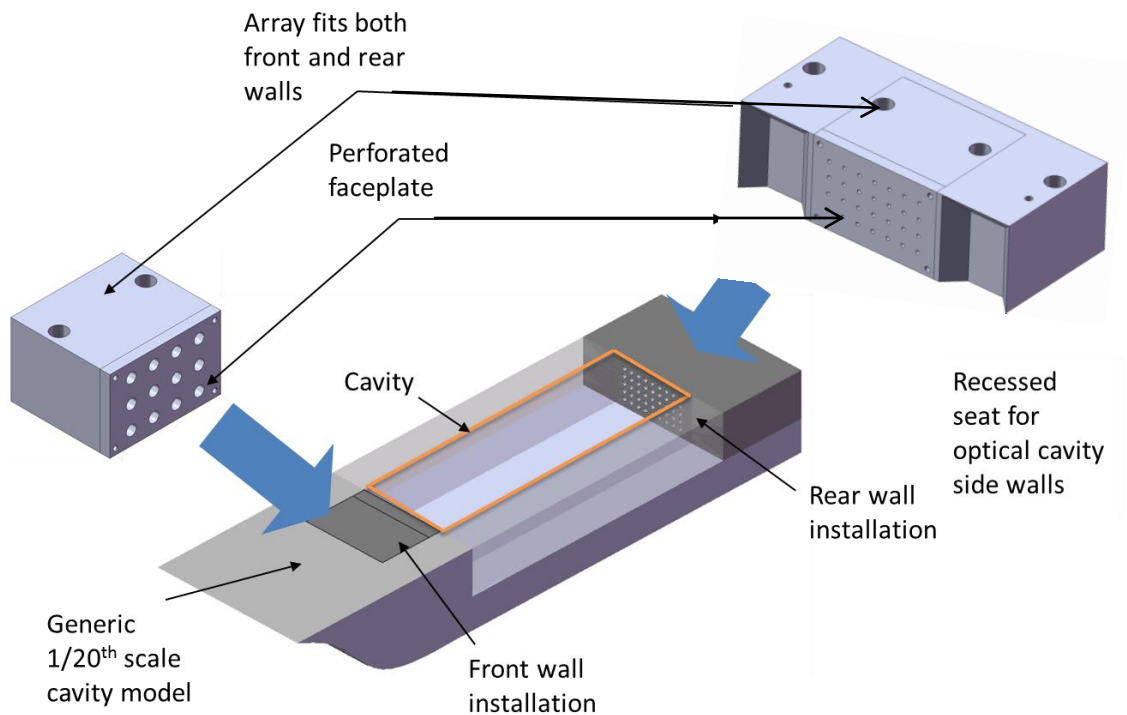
Resonant array installation into the ADDICT cavity model used within the TGF tunnel
